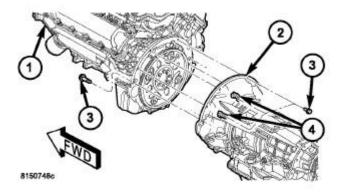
Removing/Installing Transmission to Engine Bolts Courtesy of CHRYSLER LLC
